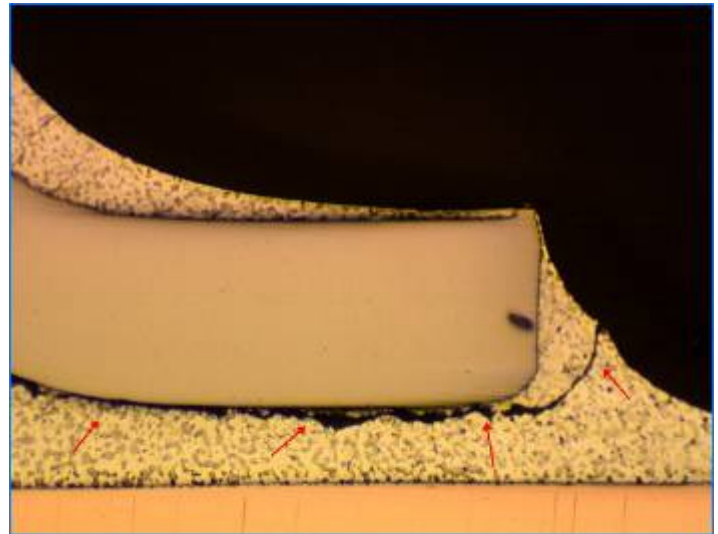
cross section, SN67, U62, right lead solder crack, 200xa
